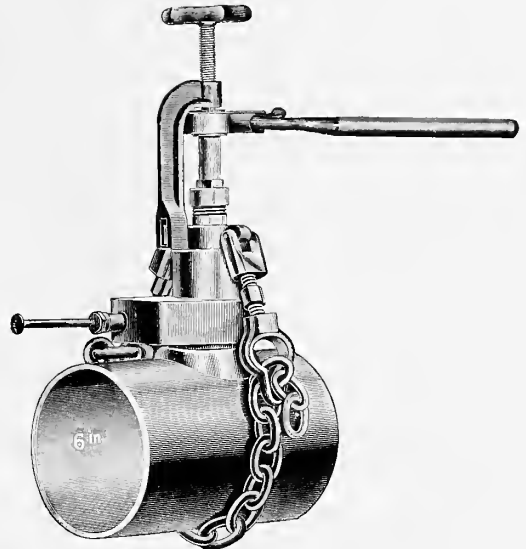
PAYNE'S IDEAL DRY TAPPING MACHINE.
